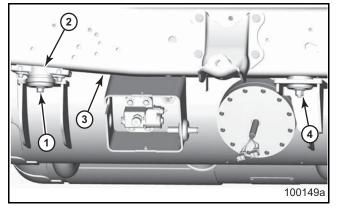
Left-Side Tank Frame Mounting Fasteners
